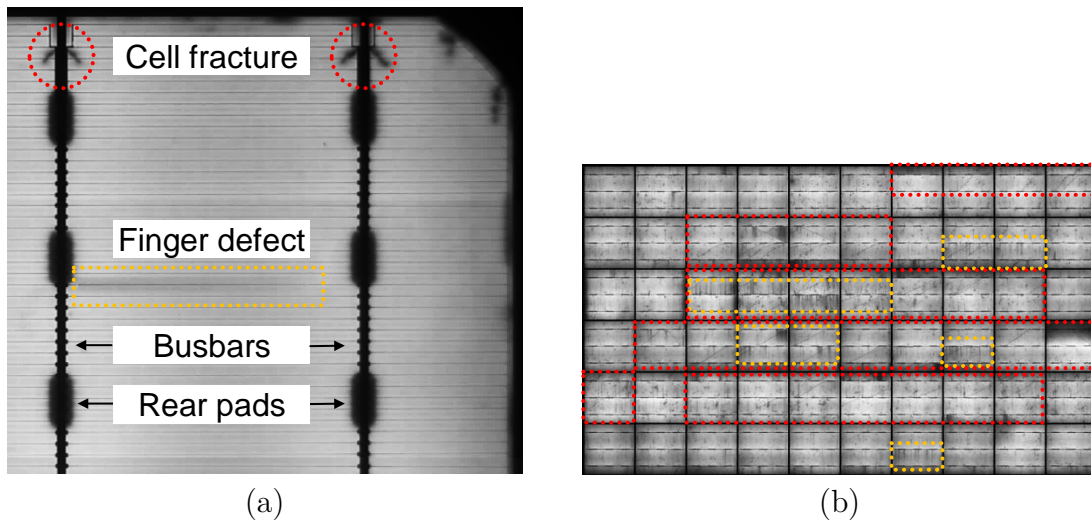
Electroluminescence (EL) images showing characteristic defects caused by thermomechanical stress: (a) diagonal fracture of a silicon solar cell at the busbar ends, as well as finger defects and (b) solar cell fracture and finger defects of a substantially damaged PV module (60 solar cells, size: 1.6 m × 1.0 m) after temperature cycling according to the IEC test standard for PV modules [95].
